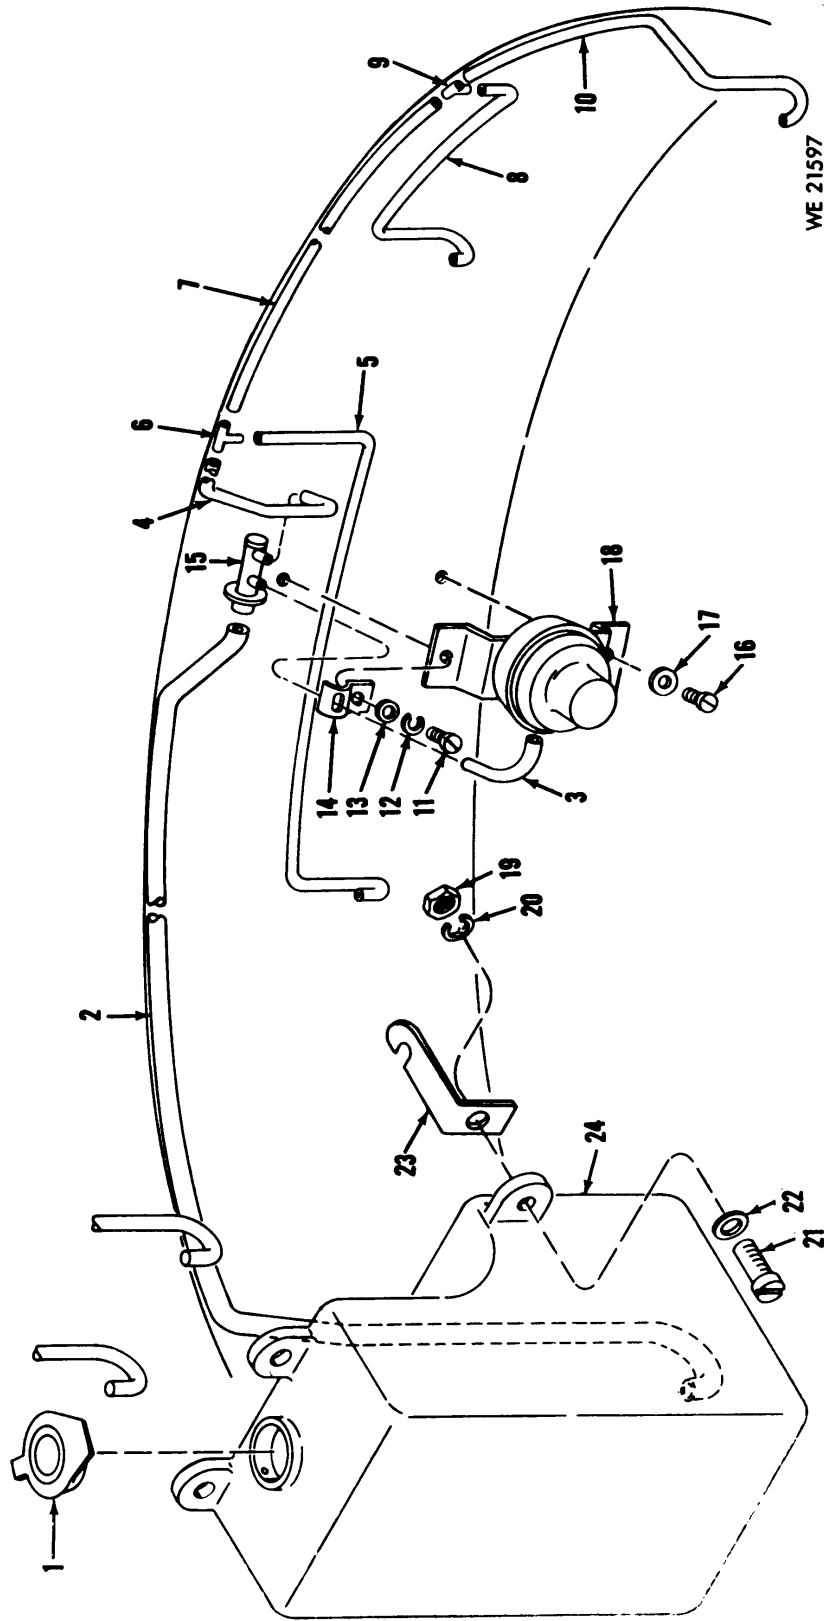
Washer, pump, and reservoir assembly 8589793 - exploded view.
